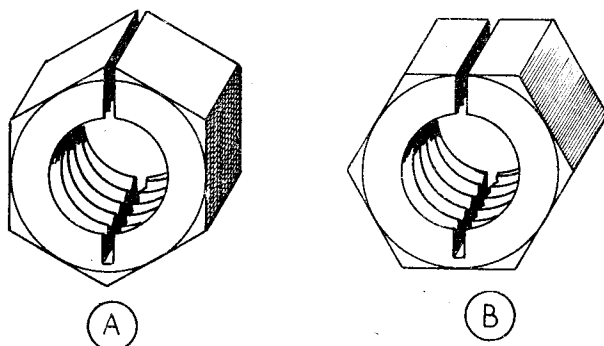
Split nut: "A" for holding work in the vice; "B" for use in the three-jaw chuck
